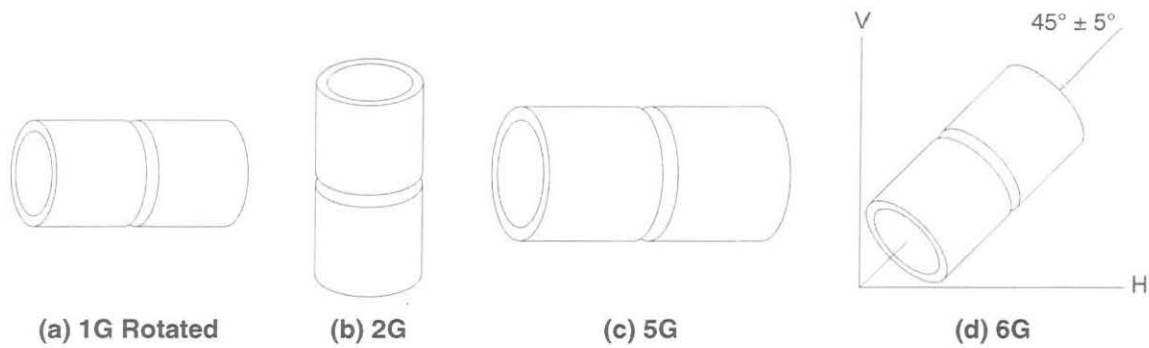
QW-461.4 Groove welds in pipe—test positions
